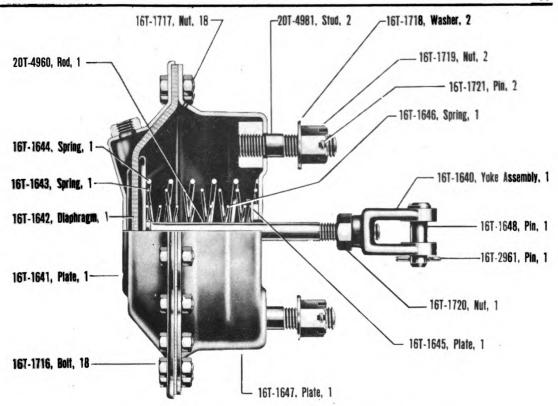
Front Axle Brake Chamber, Type B 20T-4940
